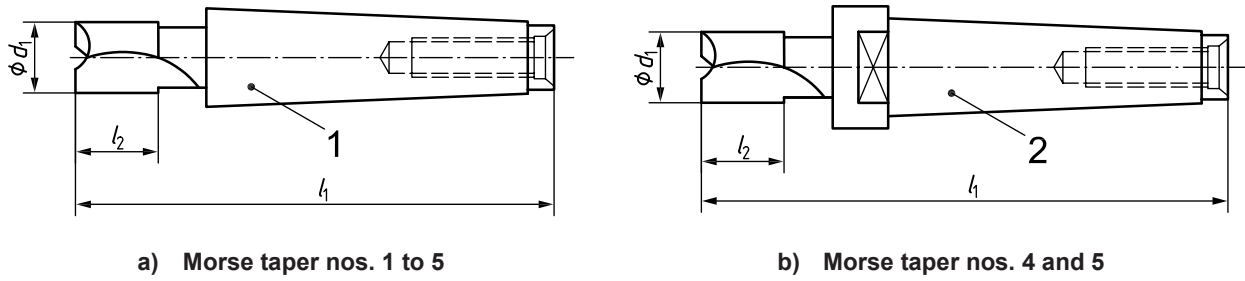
Dimensions of flat-ended end mills and ball-nosed cylindrical end mills
